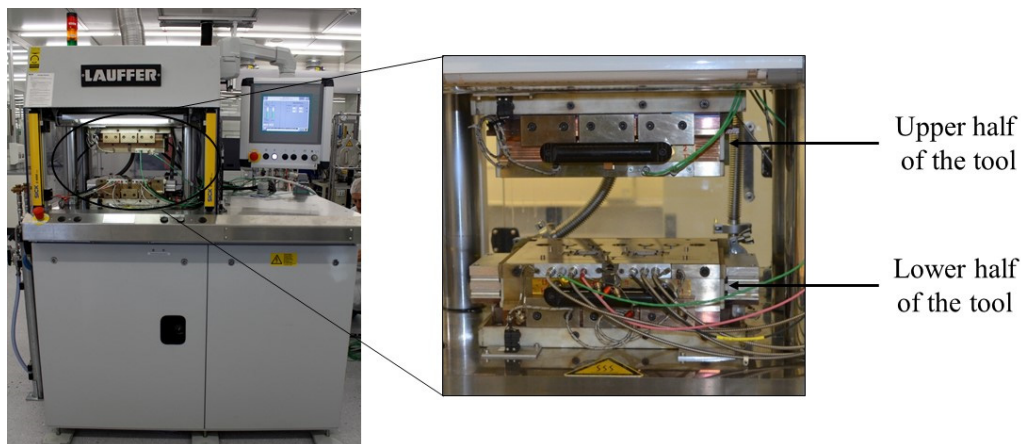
Transfer molding press LHMS 28 (left), upper and lower half of the tool (right)
